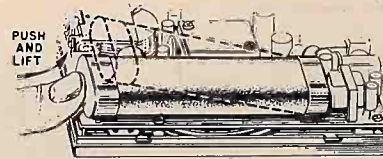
View Showing Method of Removing Battery Holder from Chassis Board.
